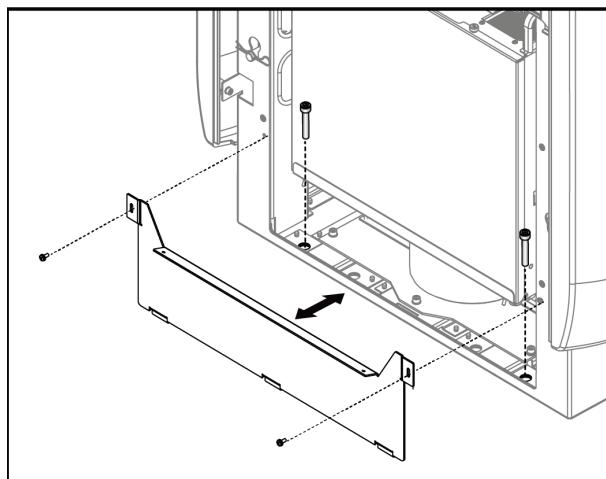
Removing the kick plate and accessing the anchor bolt locations
